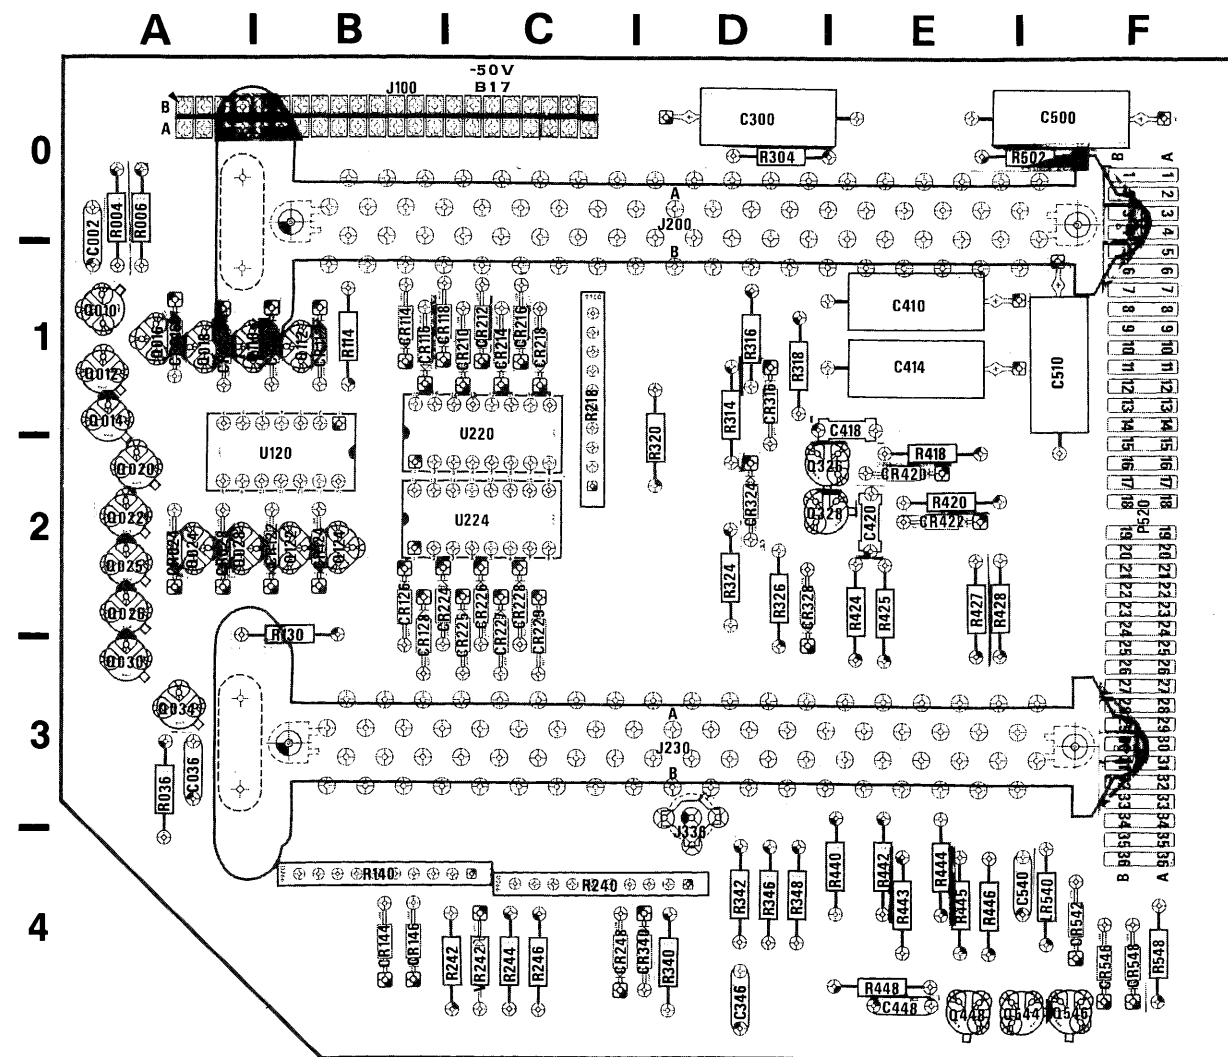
Plug-in Interface circuit board, assembly A46.
